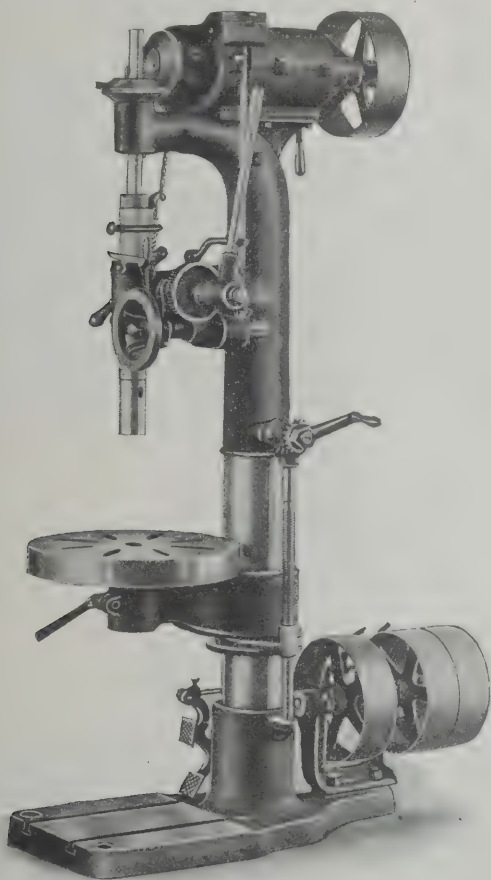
Sibley Drill Press with Geared Quick-change Speeds and Feed
